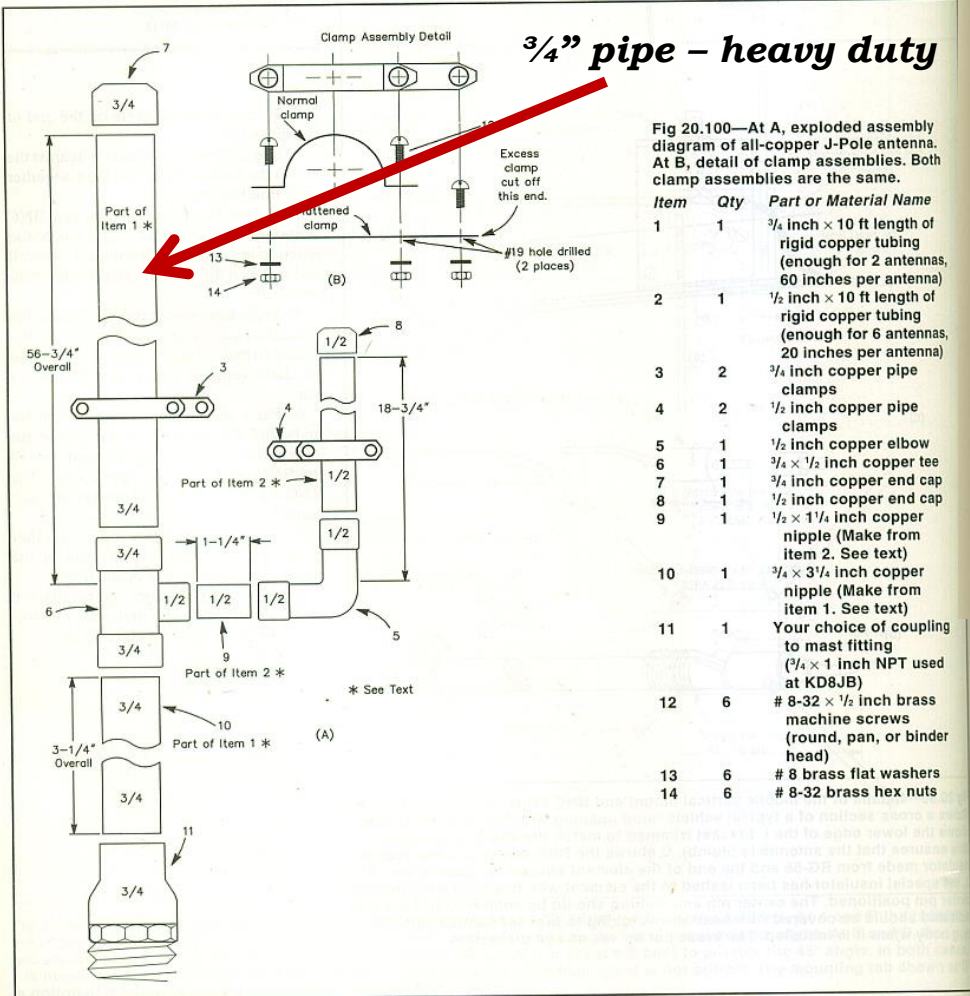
At A, exploded assembly diagram of all-copper J-Pole antenna. At B, detail of clamp assemblies. Both clamp assemblies are the same.
